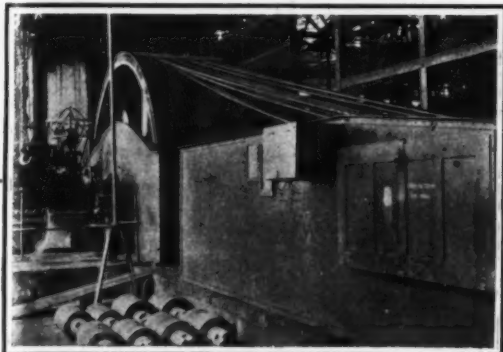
VIEW OF ROPE DRIVE FOR ROD MILL, SHOWING STEEL PLATE INCLOSURE.
